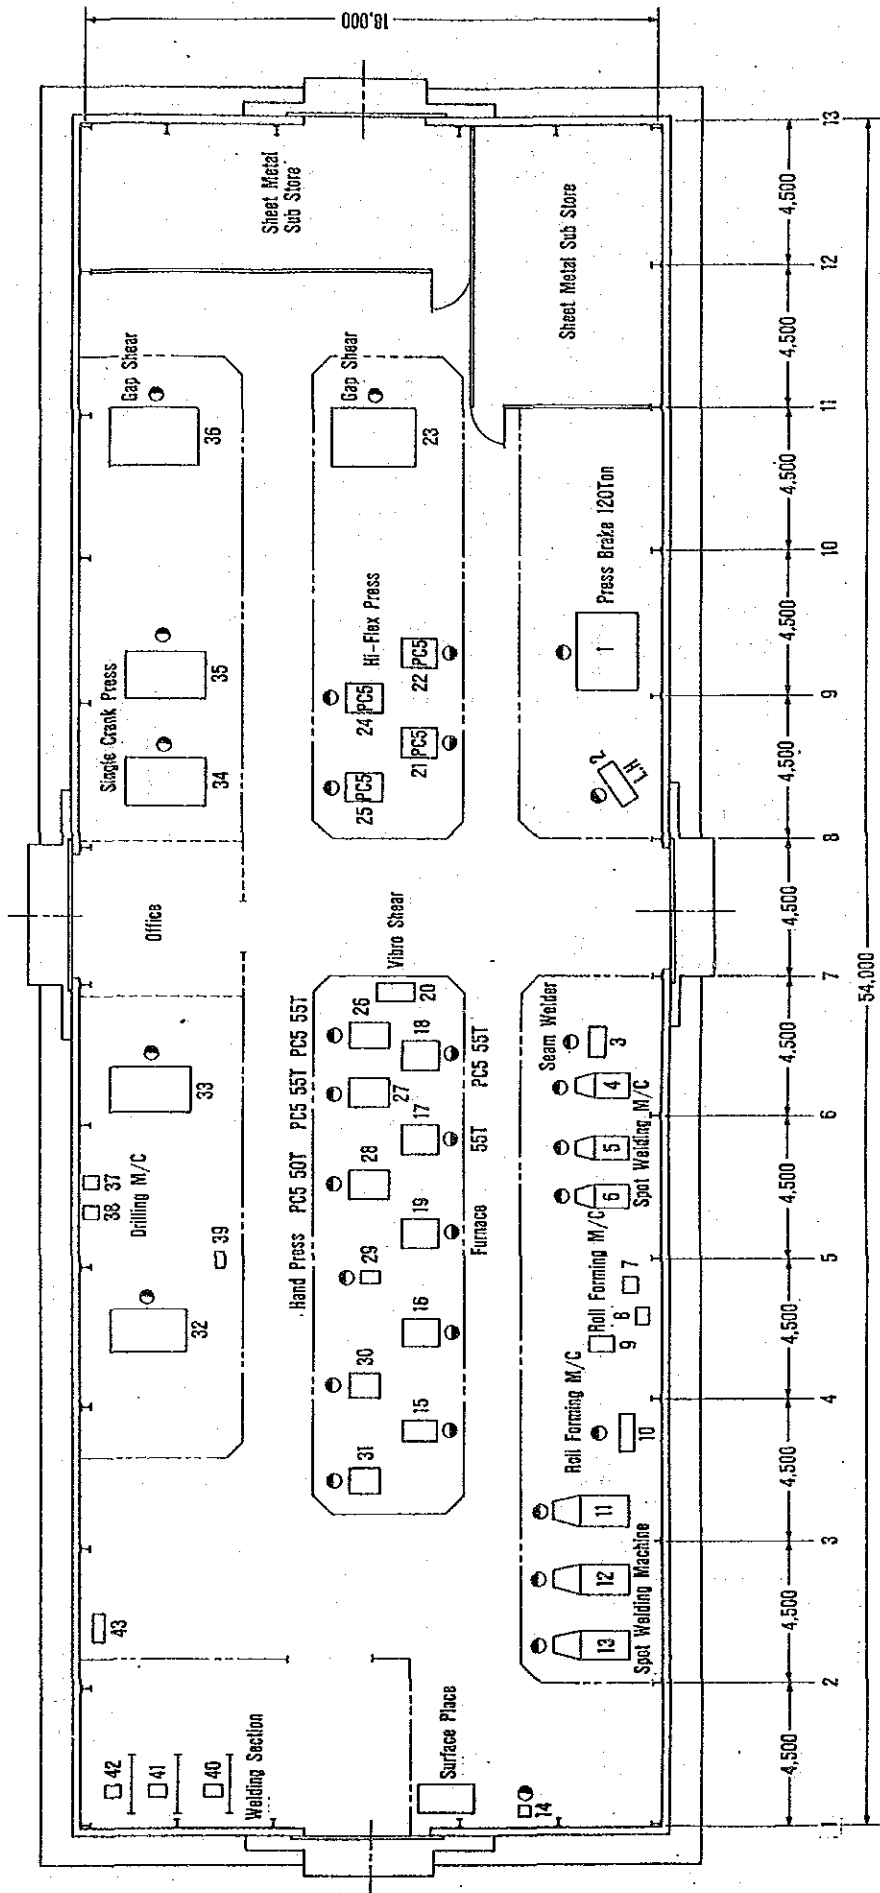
MACHINE LAYOUT OF PRESS AND WELDING
